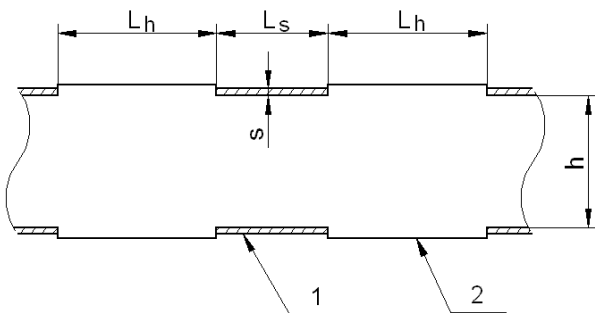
Toothed rib, the measurements of tooth are  $L_h$  and  $L_s$ , where 1- plate; 2 – rib;
